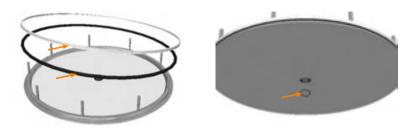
Left: Scraper seal and underlying o-ring. Right: Center o-ring.
